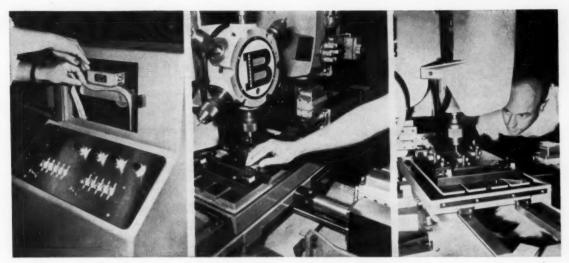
(Left) Tape-reading console of Moog "Hydra-Point" machine table control system. (Center) Work-piece being placed on table of Burgmaster drill press equipped with Hydra-Point Control. (Right) Operator watches as hydraulic pistons position table for drilling.
